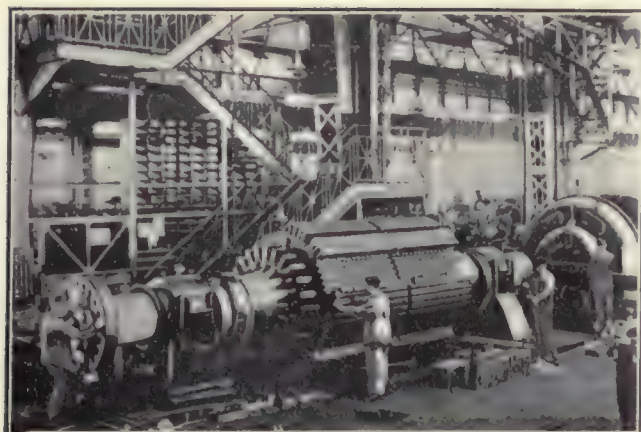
NEW TYPE OF ROTOR WITH SHRUNKEN STEEL DISKS CONTAINING DOVETAILS FOR TEETH
